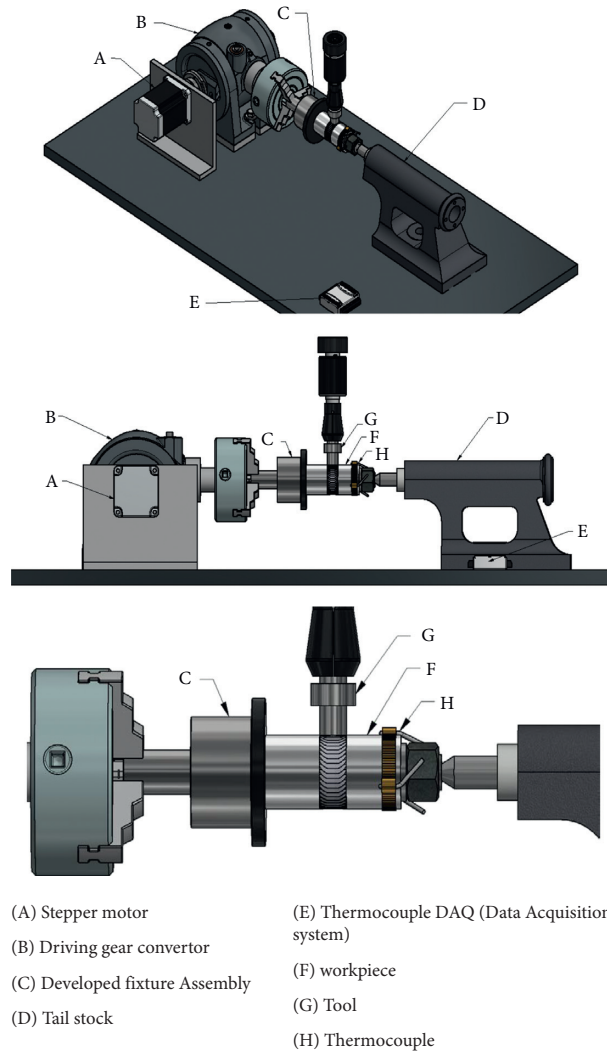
Friction stir welding components and mechanism of welding.
